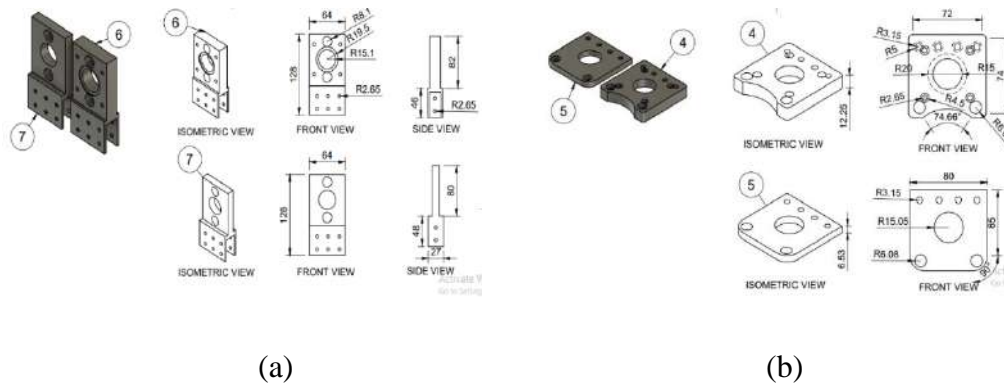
(a) Dimension of Y- axis bearing/ stepper motor holder (b) Dimensions of Z- axis Bearing/ stepper motor holder.
